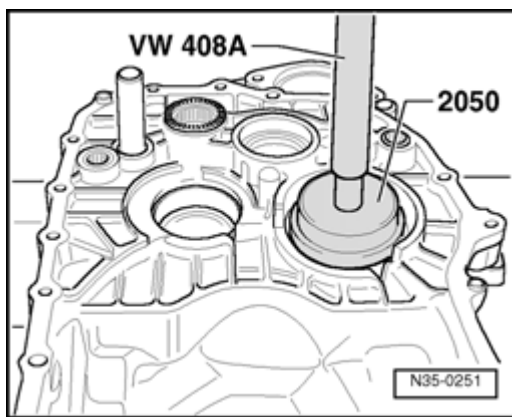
Pressing tapered roller bearing outer race into transmission housing
